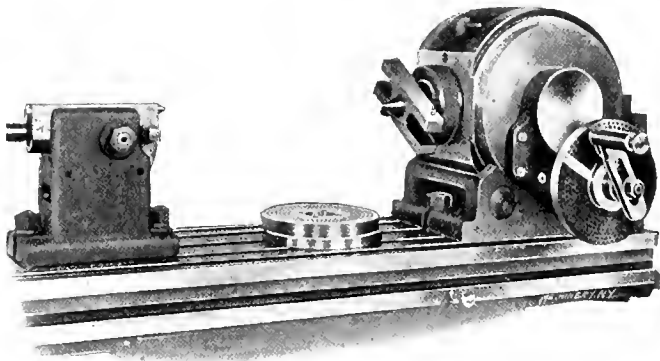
Plain Dividing Head adapted for all Forms of Indexing Work except Spiral Cutting, and used on the Plain Milling Machine
